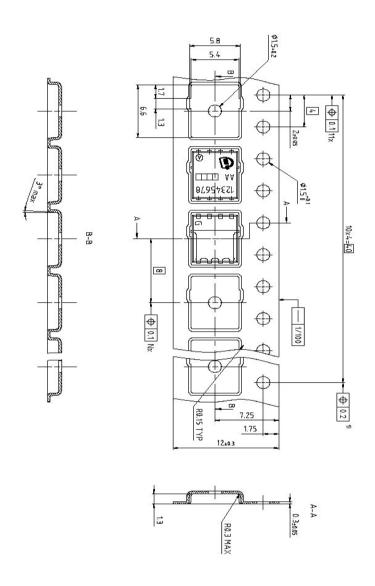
Packaging variant PG-TDSON-8, dimensions in mm
